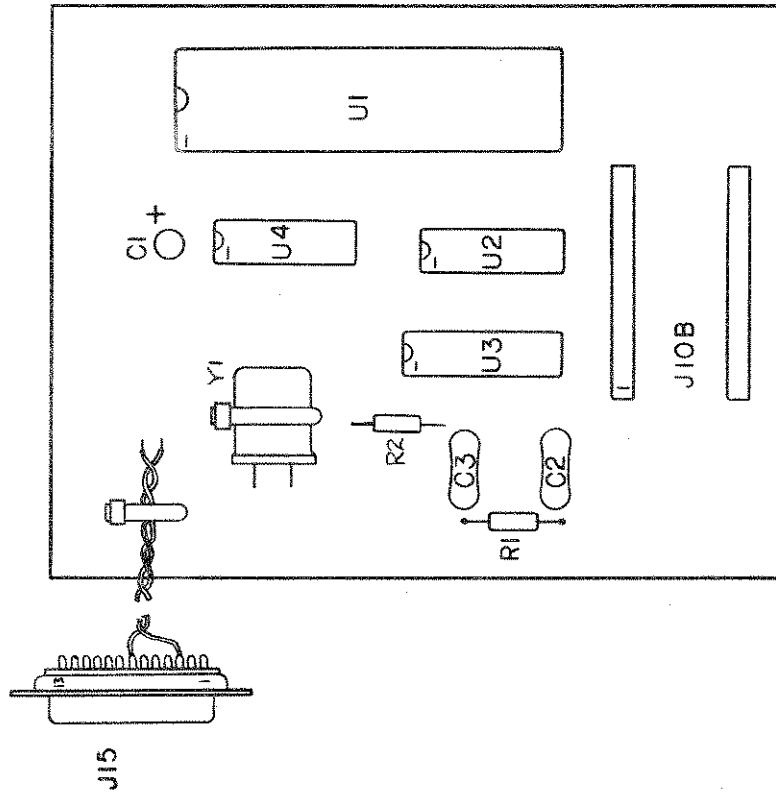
Option -050, IEEE-488 Compatible Interface PCB Assembly
